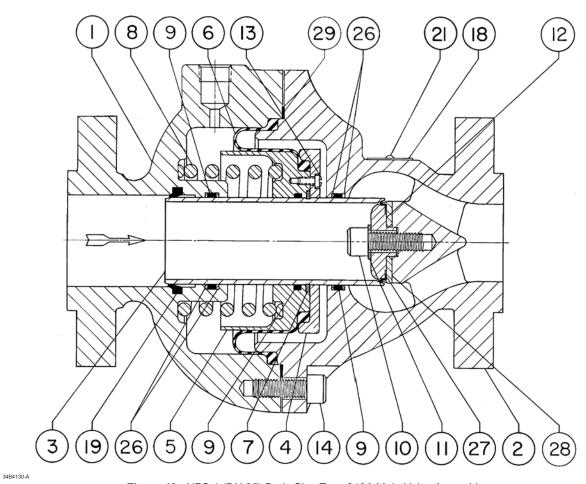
NPS 1 (DN 25) Body Size Type 310A Main Valve Assembly
